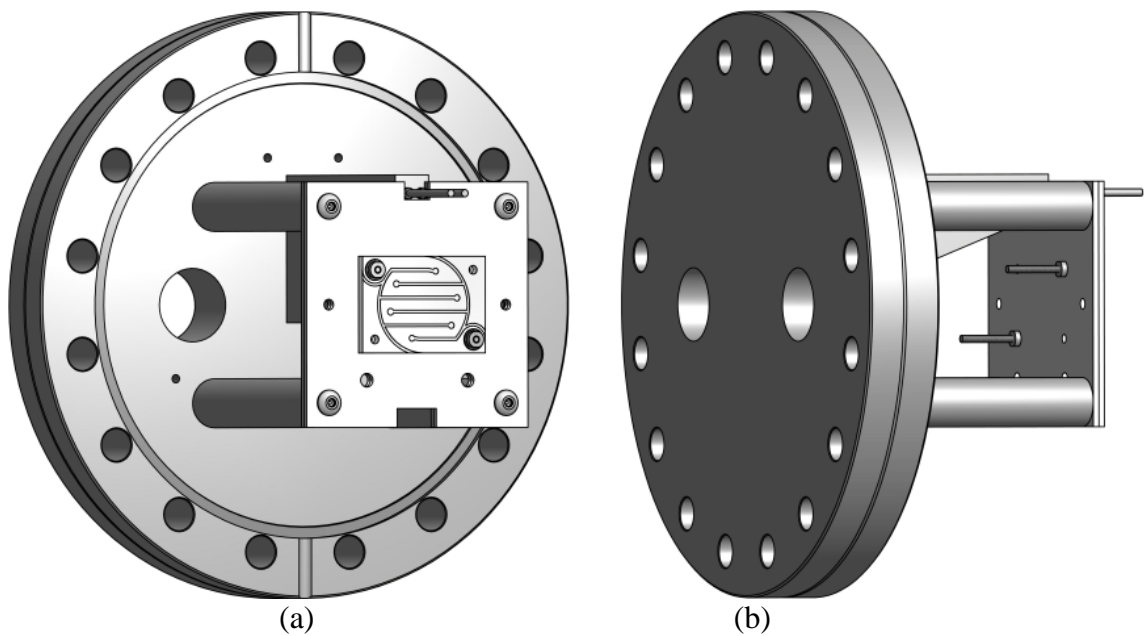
Schematic of assembled heater on stage (a) front and (b) back views. In (b) the last two Mo nuts that hold the heater on the alumina stage are seen.
